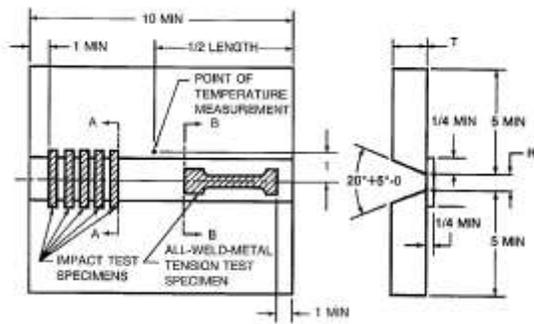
Plate for removal of specimens for tensile and impact test of the weld metal. (dimensions in inches). [2]
